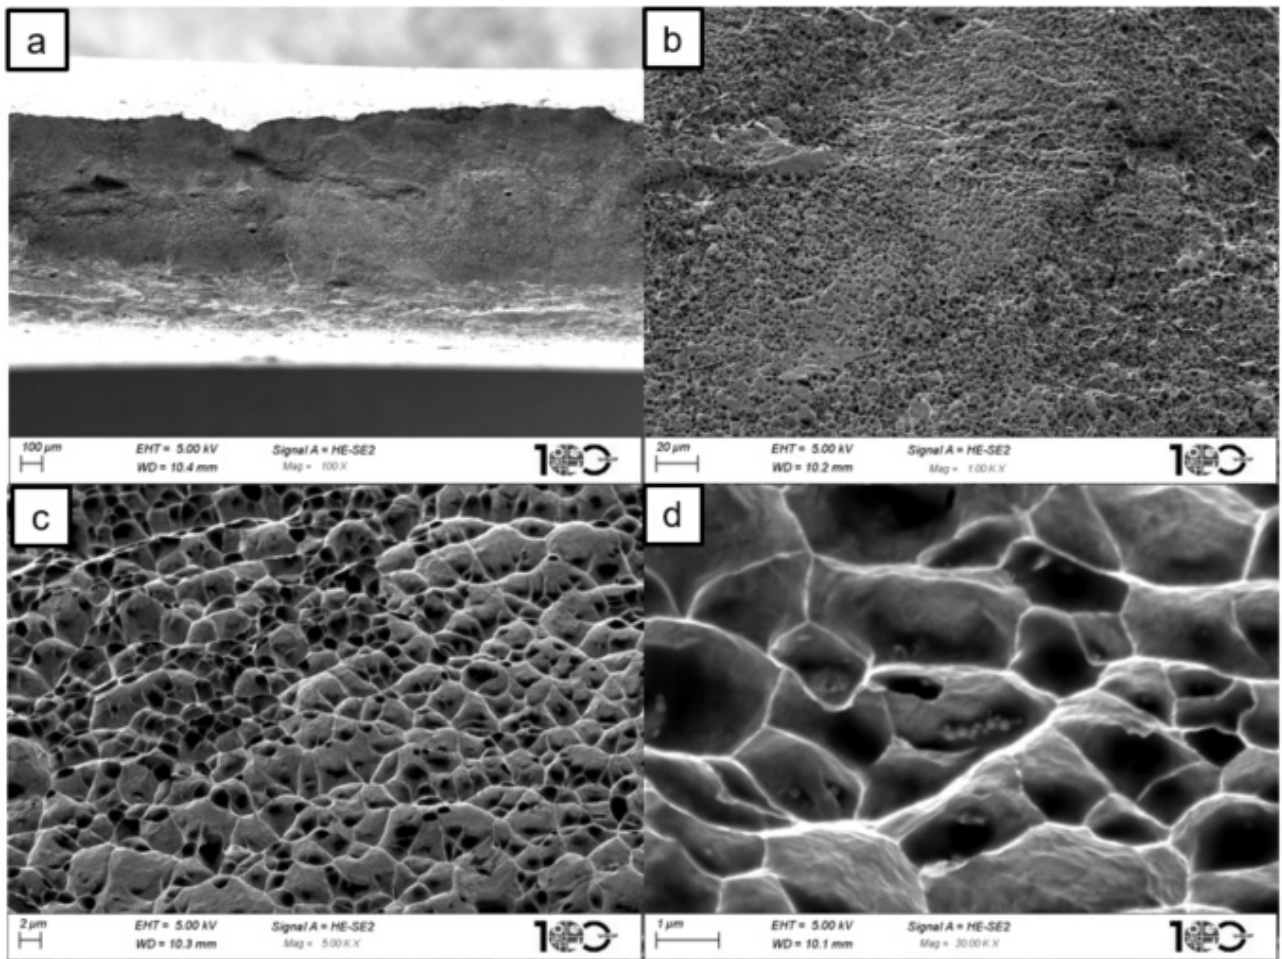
Fractures formed during the tensile test observed on the side of steel 904L using various magnification values (SEM)
